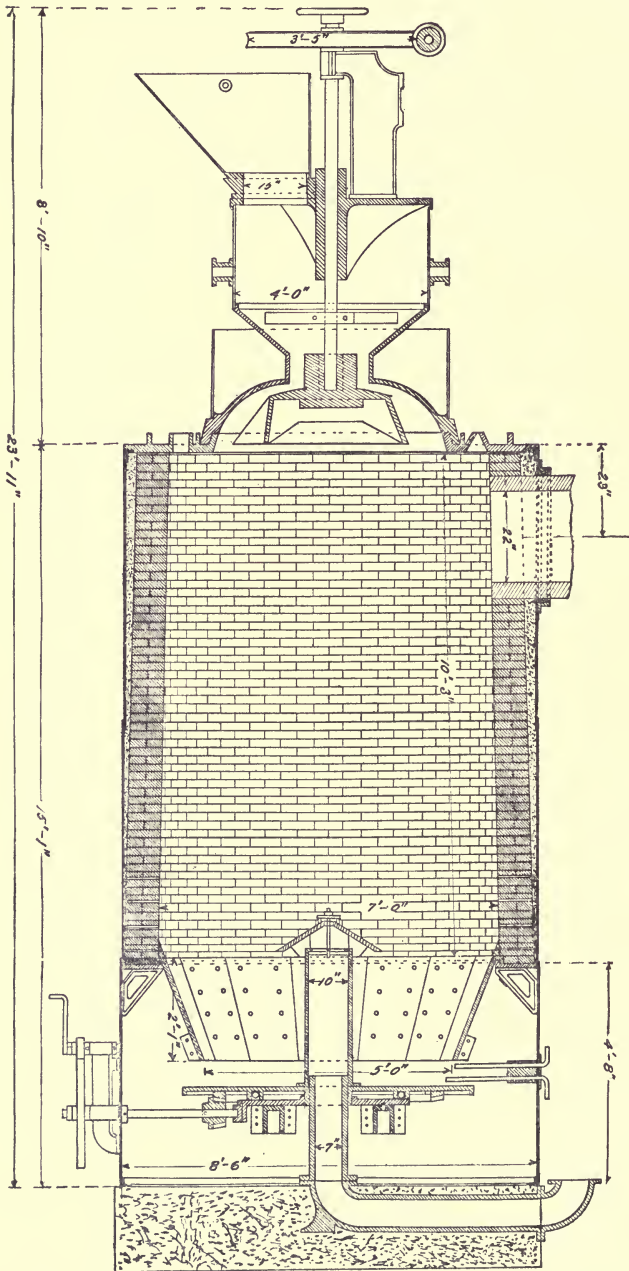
ELEVATION SHOWING GENERAL ARRANGEMENT OF PRODUCER-GAS PLANT (Prof. Paper 48, p. 983)
